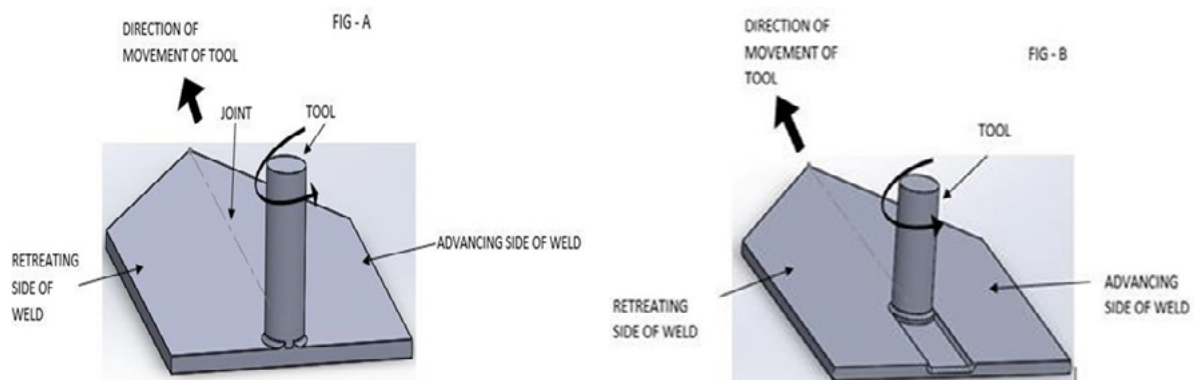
(A & B). Advancing and retreating side in Friction Stir Welding
